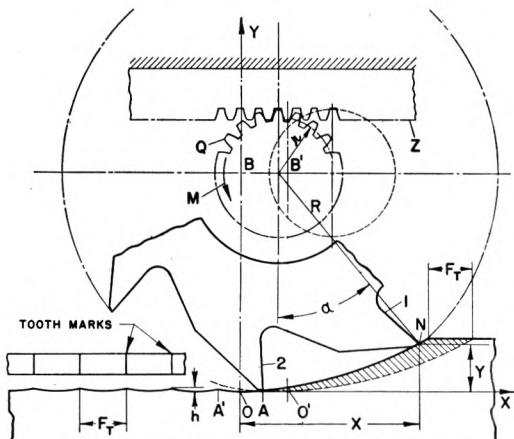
PATH GENERATED BY A MILLING-CUTTER TOOTH
